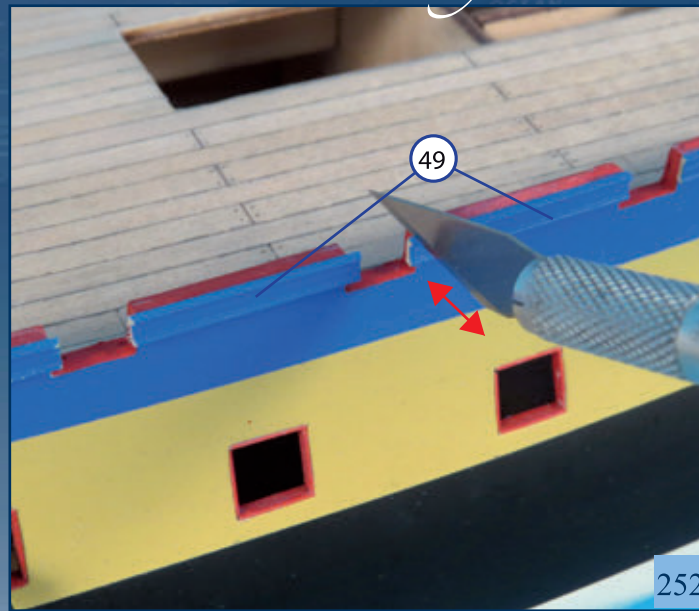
From the moulding 49 made, mark and cut a part long enough to cover the upper part of the raised section of the bow section.
